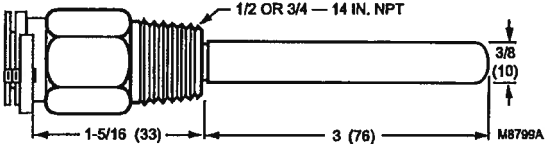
Approximate boiler fitting and bulb dimensions in inches (mm) for L4006C and L6006B.
